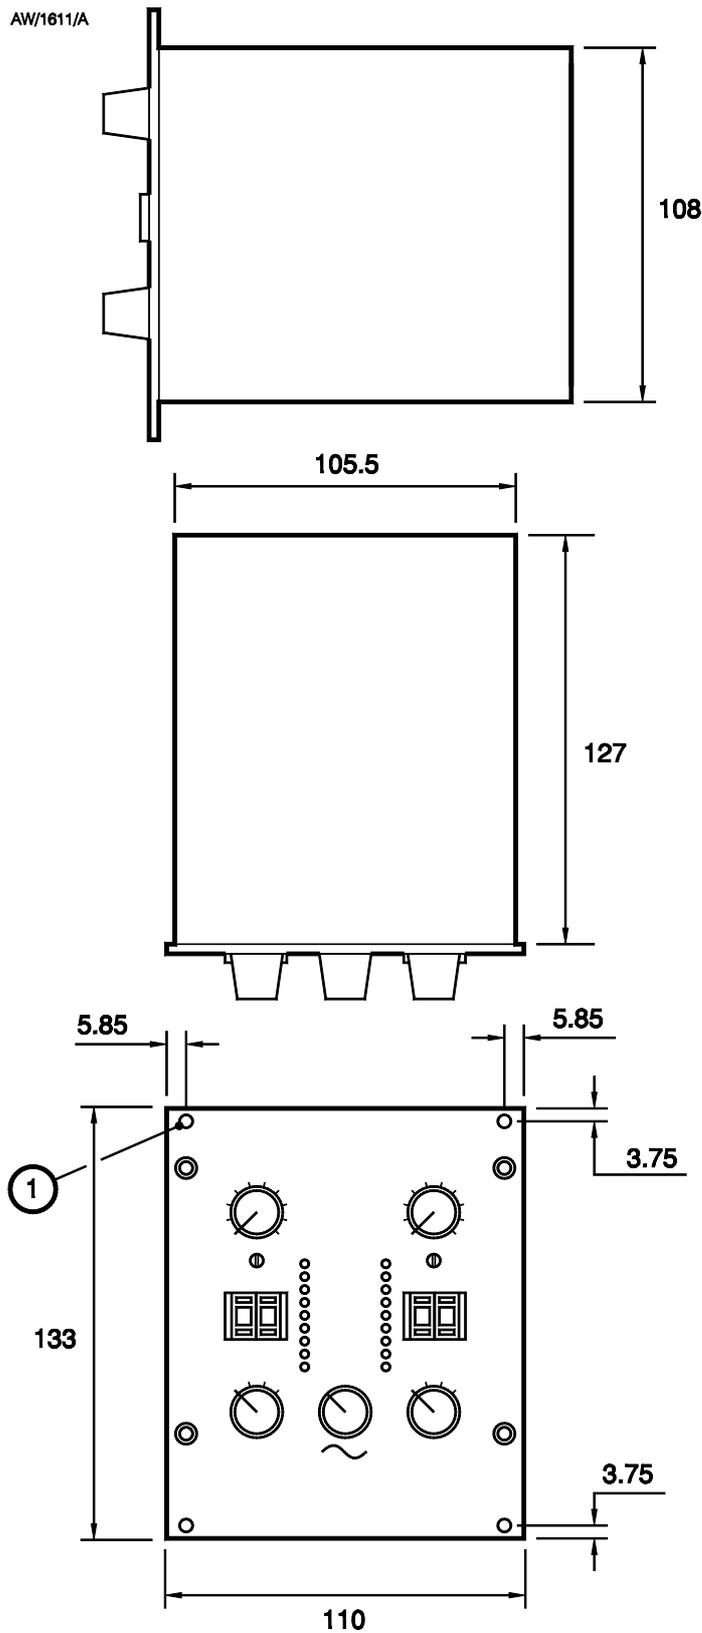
Dimensions of the EB3 Power Supply Unit (mm)
